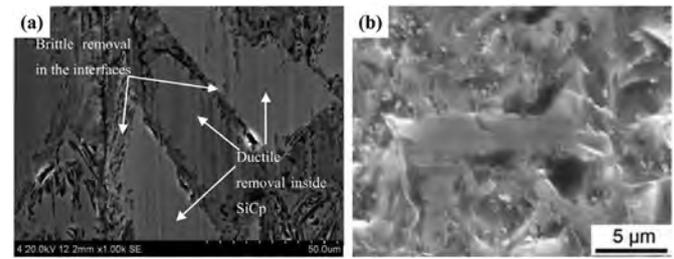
Improvement of grinding surface quality by ductile removal of SiC particles [191,217]: (a) ELID grinding; (b) cryogenic grinding.
